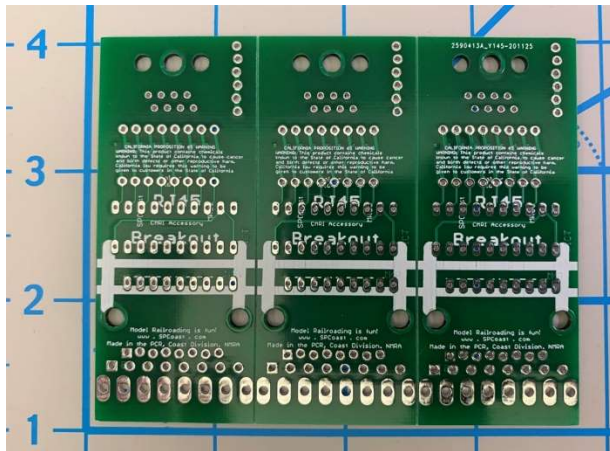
bottom of RJ 45 inverter board - cut traces under the prop 65 warning
